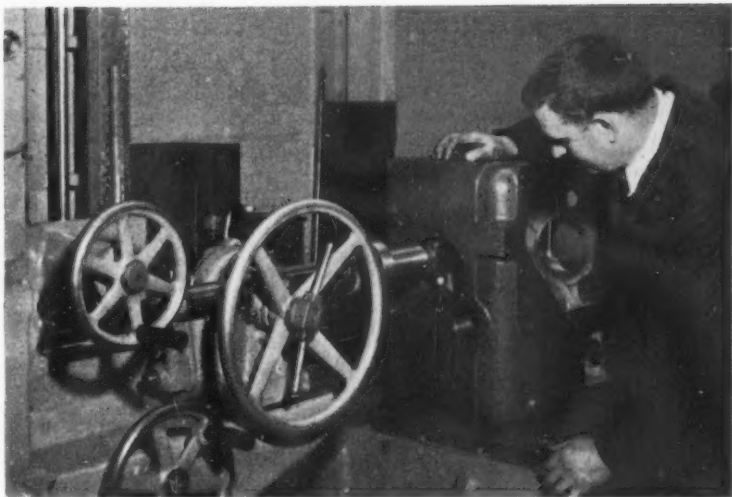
A Close-up View of the Herbert Horizontal-Spindle Drilling Machine Equipped with a Right-angle Spindle Attachment for the Production of an Oil Hole in a Main Bearing Bore
